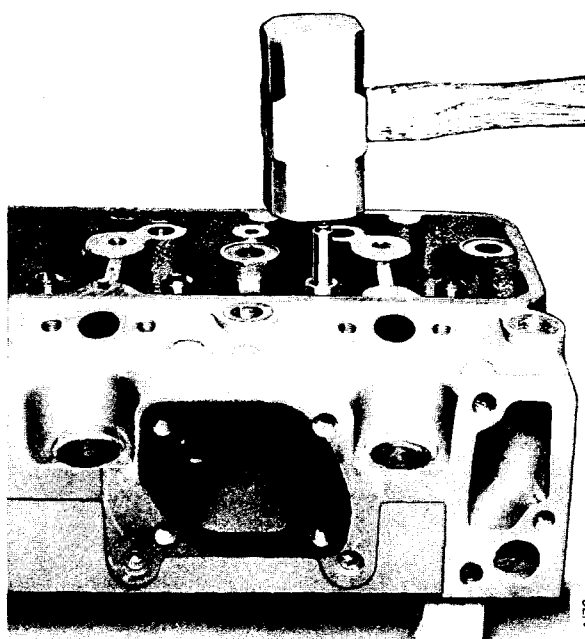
Tap out the valve seat ring with welded-on valve
